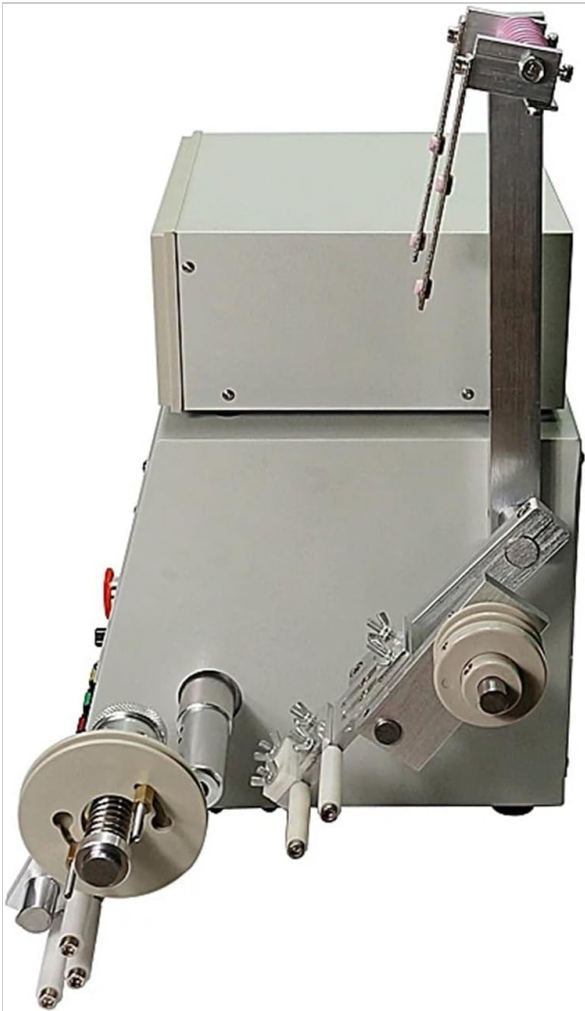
Side view of the machine, providing a clearer look at the winding displacement mechanism and wire guide.
